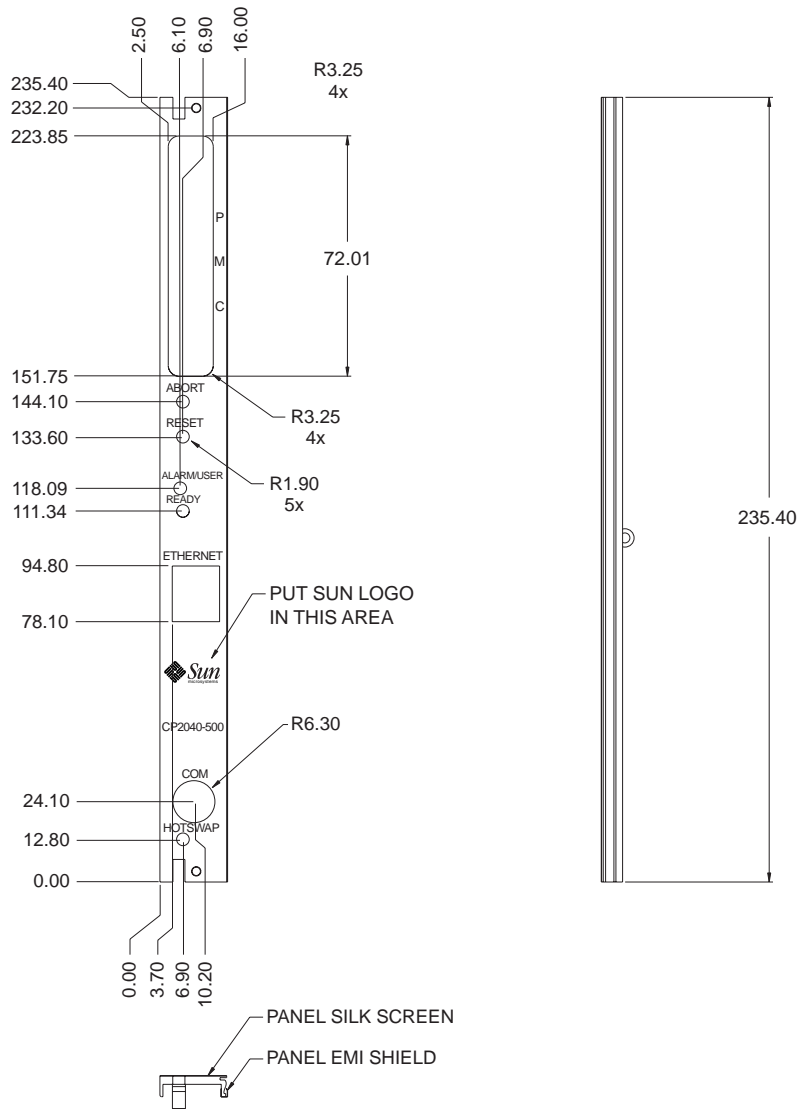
Mechanical Drawing of the CP2040 Front Panel
